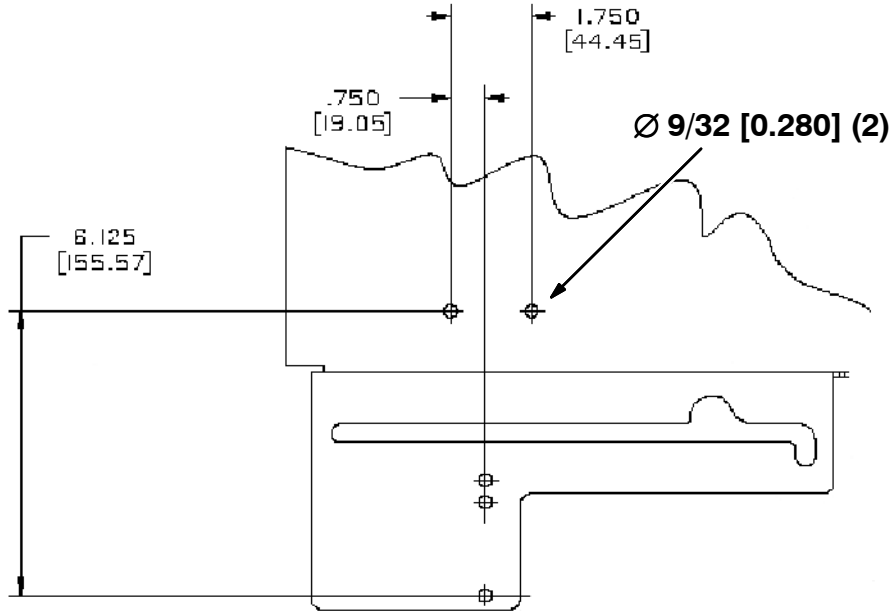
REWORK, SEAT SUPPORT PANEL
